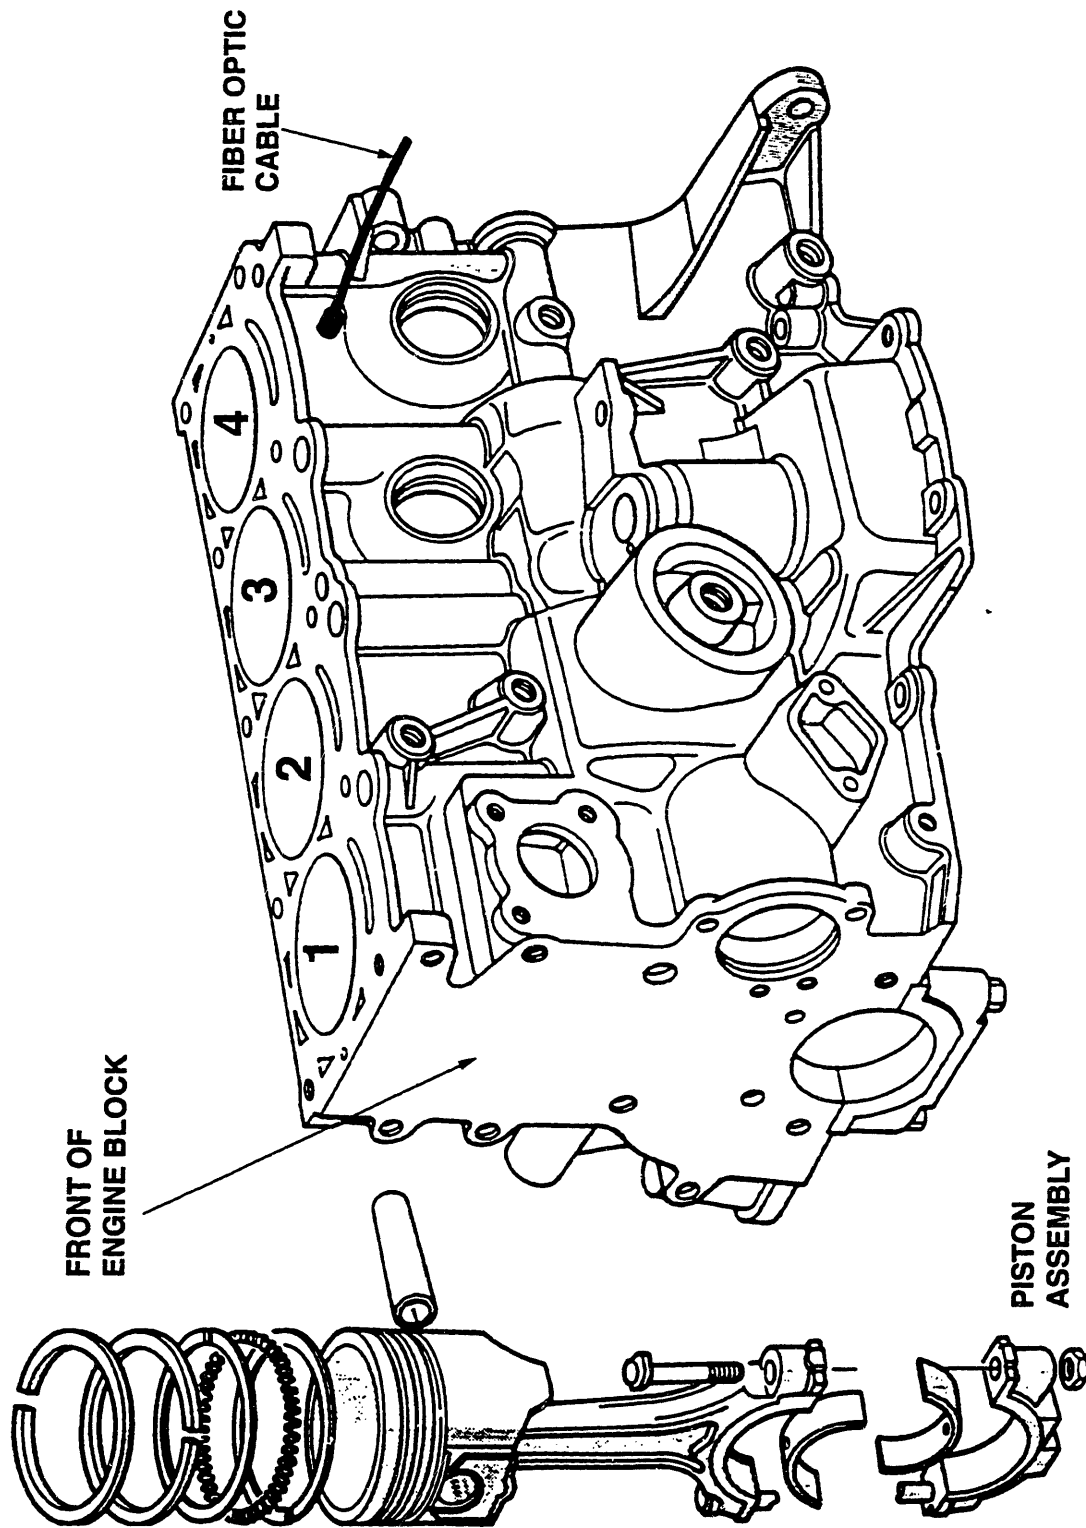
CHRYSLER ENGINE BLOCK AND PISTON ASSEMBLY
